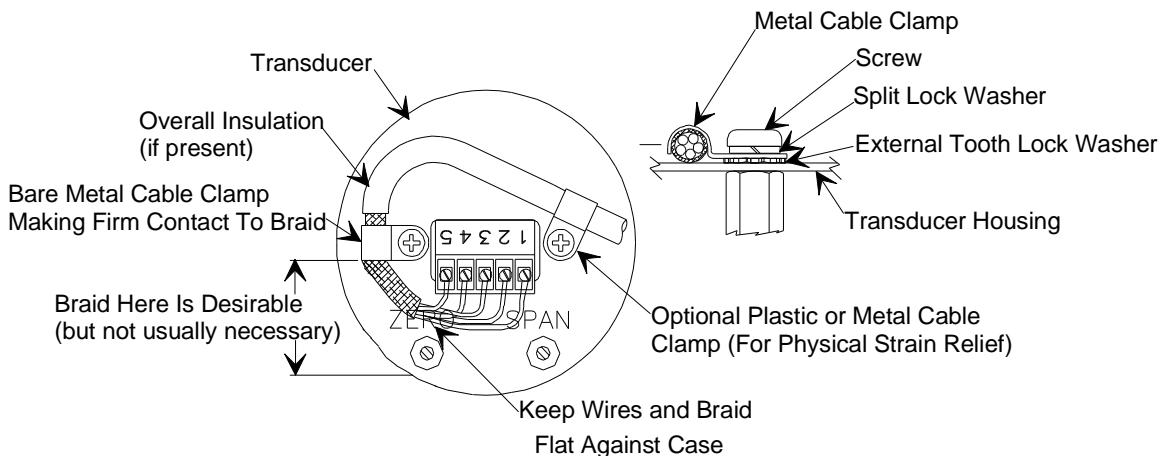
How To Connect the Cable to a Terminal Block (Example 1)
